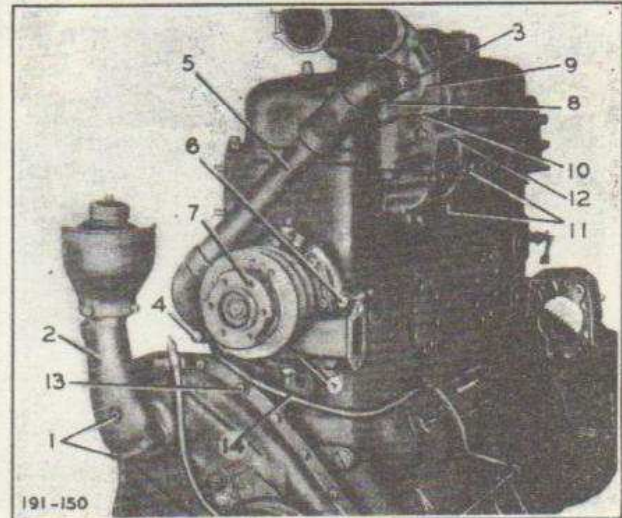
Front and Left View of Engine, Identifying Parts To Be Removed
